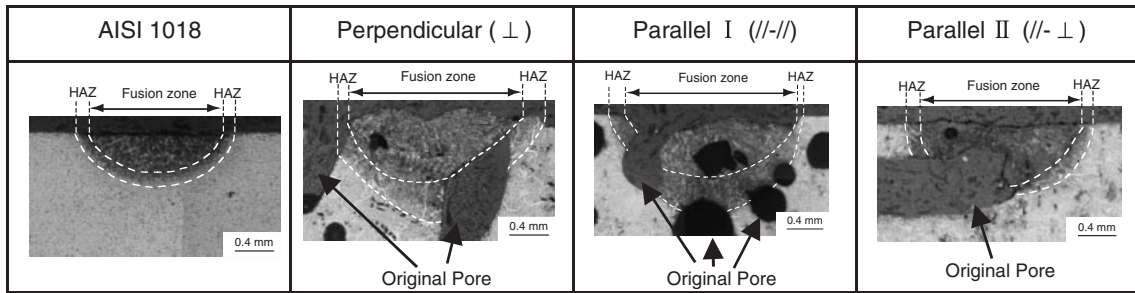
Cross section of the laser weld beads of the nonporous iron (AISI 1018) and lotus-type porous iron; pore directions perpendicular (\perp), parallel I ($//-/$), and parallel II ($//\perp$) to the specimen surface at a laser power of 1.0 kW and welding speed of 1 m/min.
